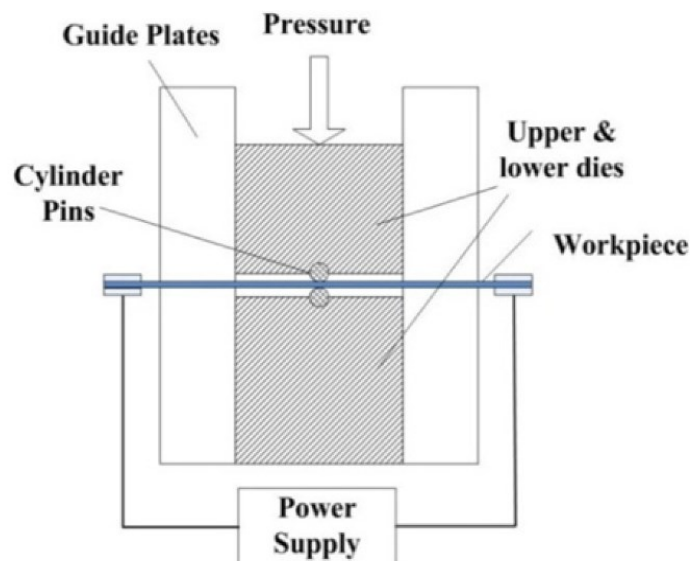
Schematic of an electrically assisted pressure welding process [130].
